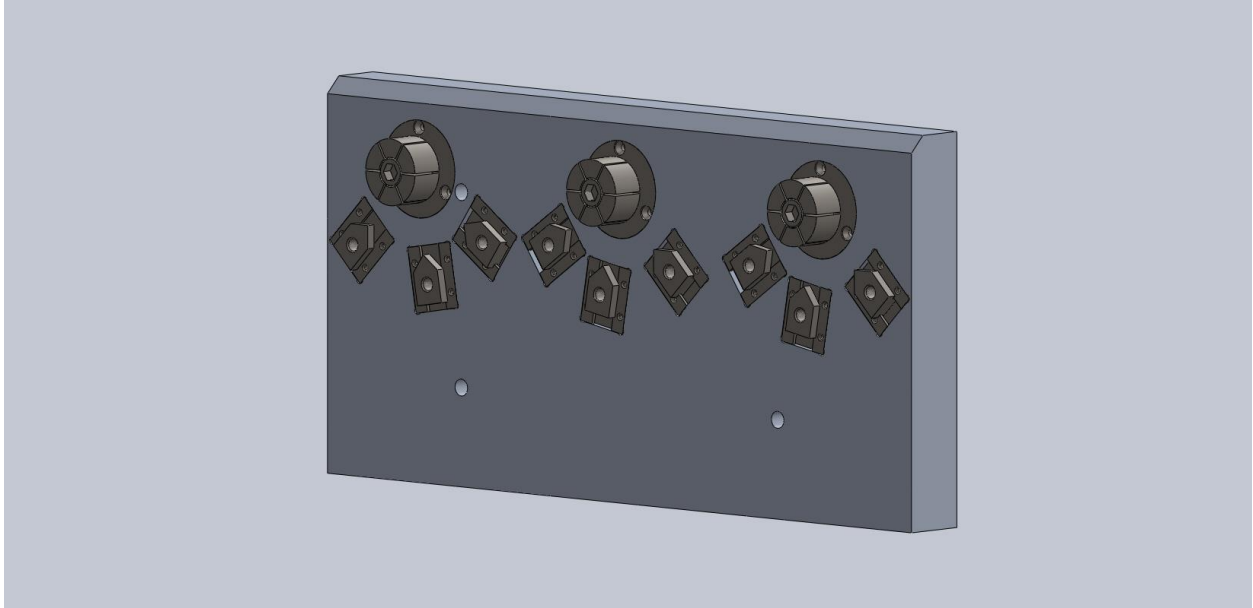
3-D Rendering of final Delta Seal gland fixturing device.
